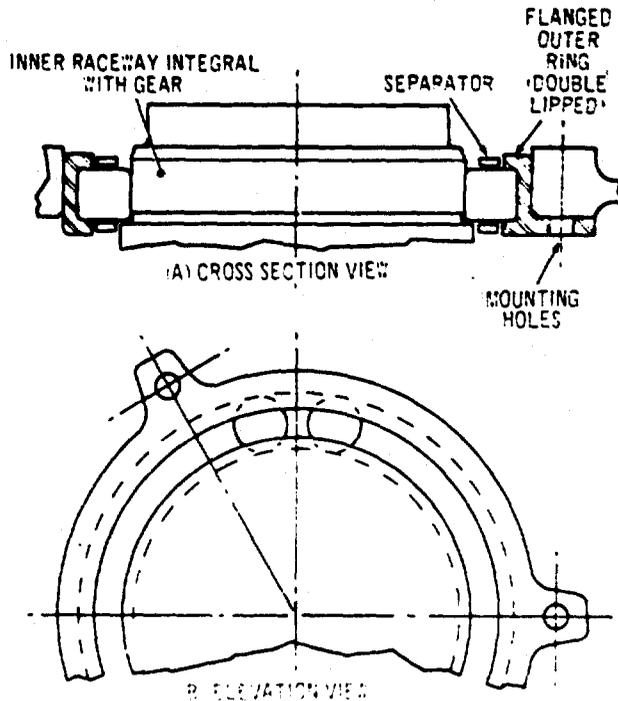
Flanged Outer Ring of Roller Bearing
